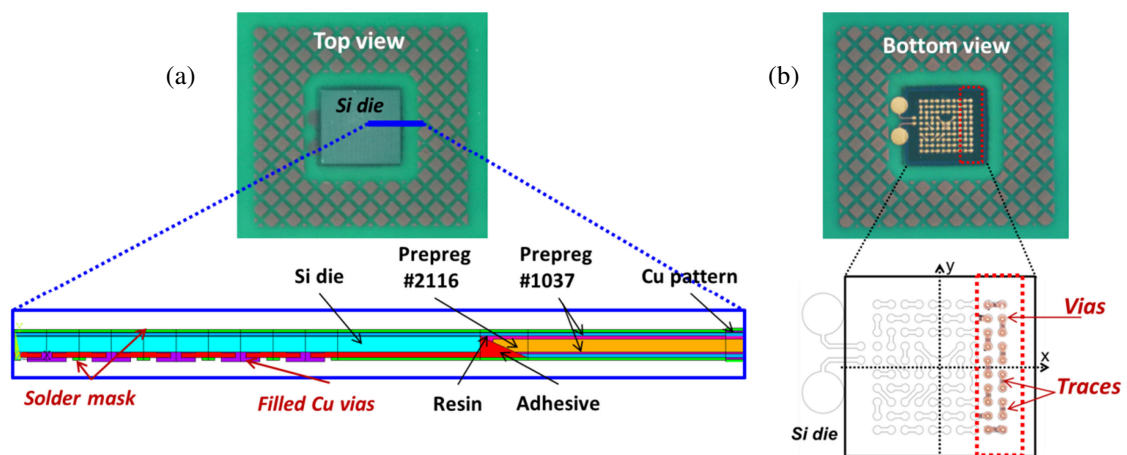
The investigated package with configurations of copper vias and traces: (a) Package top view with a cross section, (b) Package bottom view with a detail of the vias and the traces.
